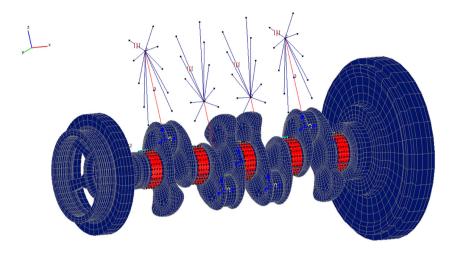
Multi body dynamic coupling model of diesel engine crankshaft main bearing.
